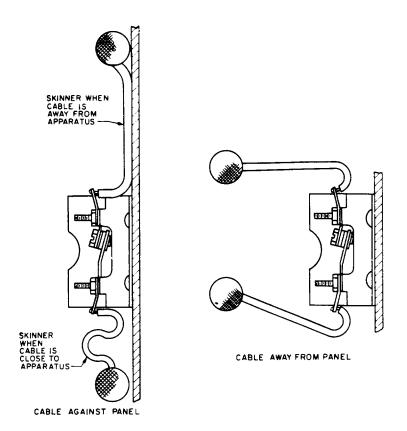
Terminal Blocks - States Co. - No. 14 Gauge and Smaller Wires
